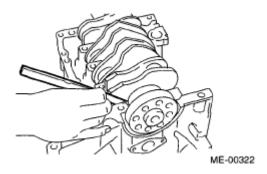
Measuring Thrust Clearance Of Crankshaft Courtesy of SUBARU OF AMERICA, INC.
